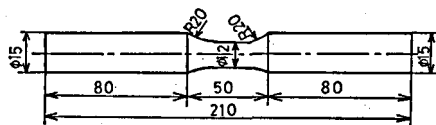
Form and Dimension of Fatigue Test Specimen.
